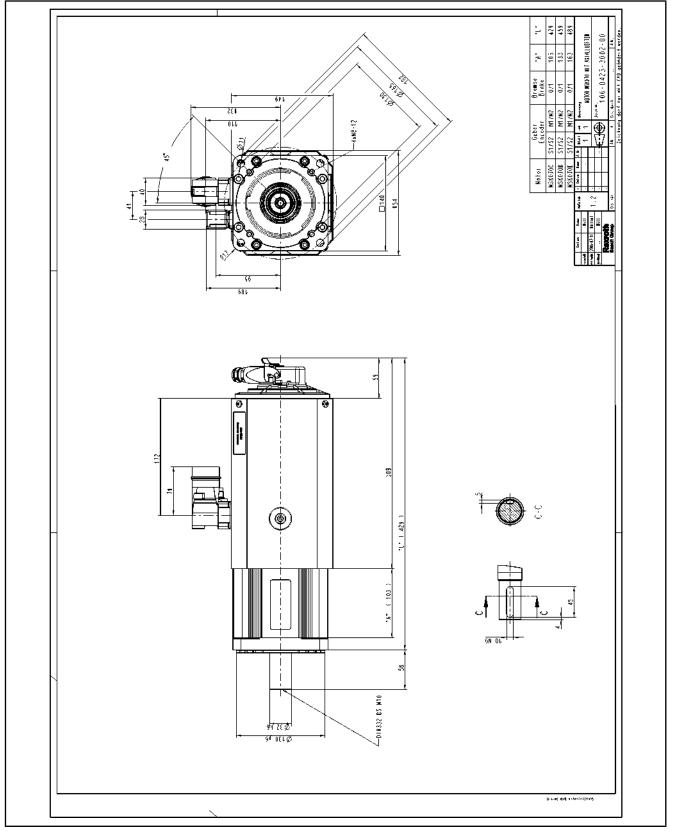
Dimension sheet MSK070 with axial fan unit
